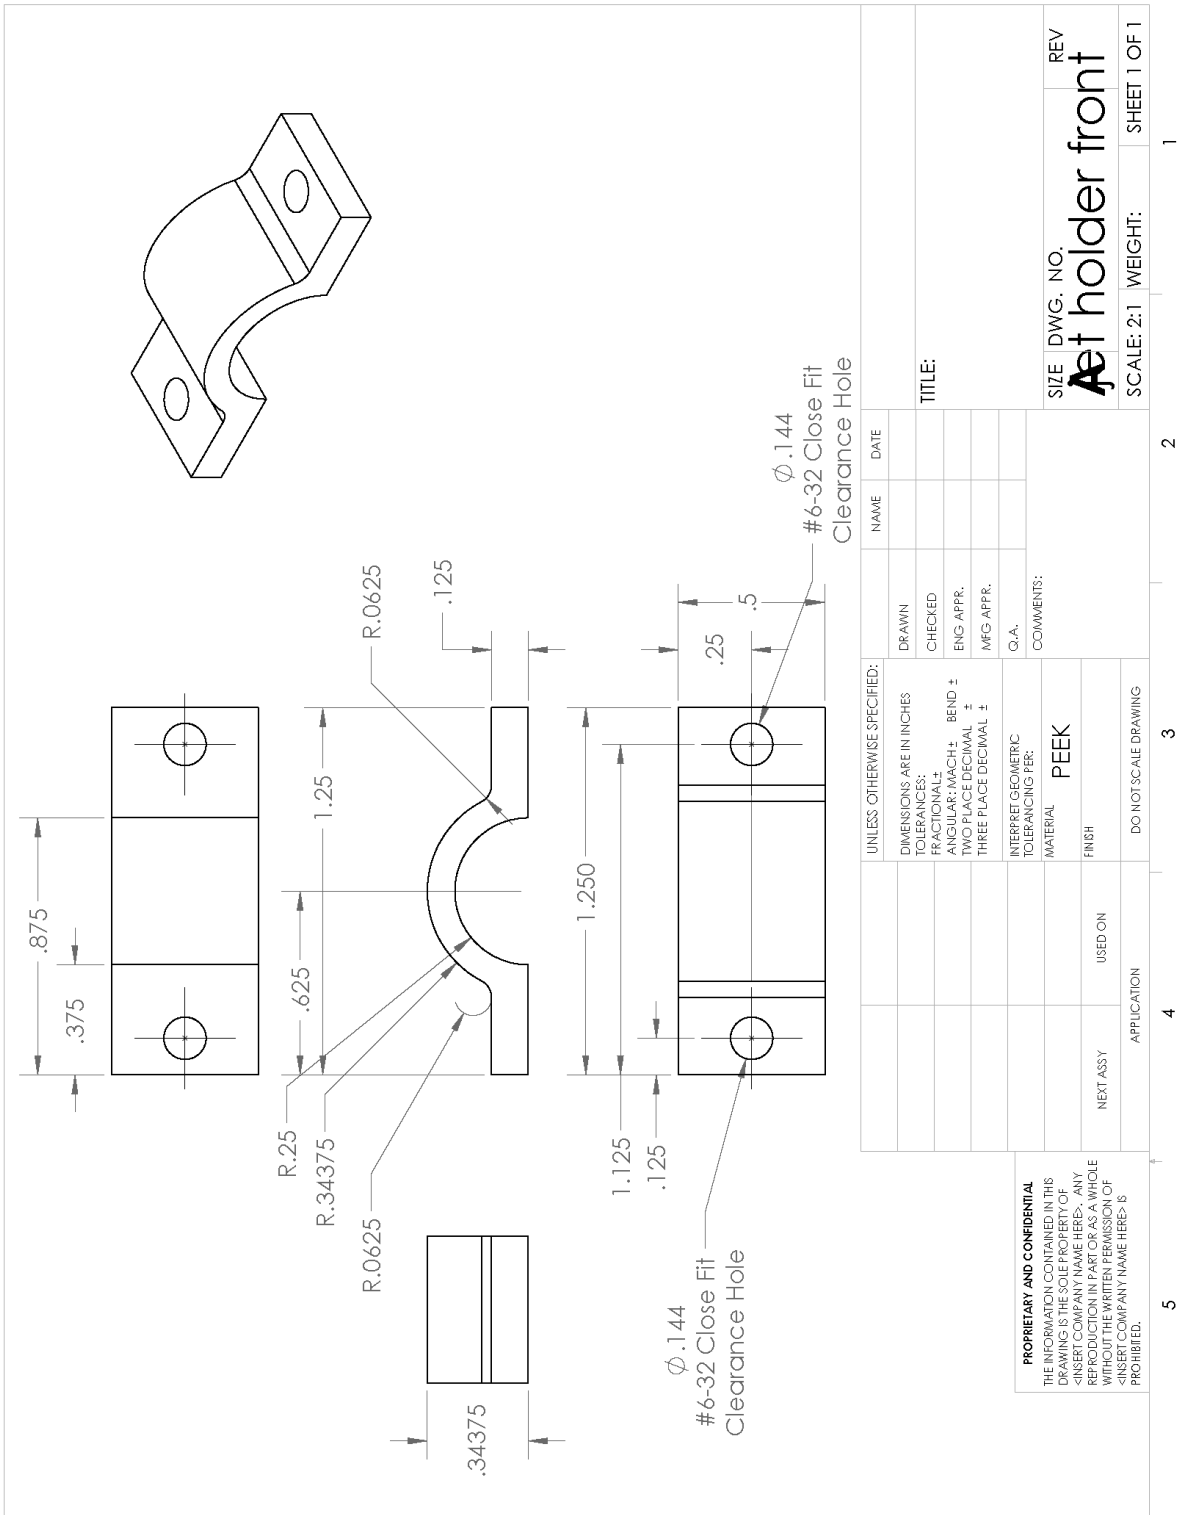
The front half of the insulating mounting assembly that holds the microjet.
